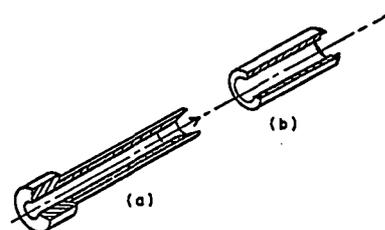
"Biscuit cutter" used for punching out indium washers.
